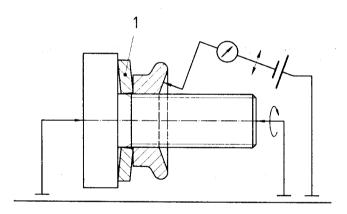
measuring device for verifying perpendicularity (total run-out) specified in Figures 79, 80 and 81
